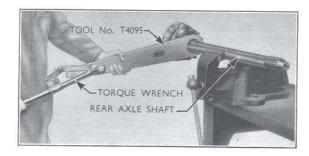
Tightening the Axle Shaft Bearing Retaining Nut
